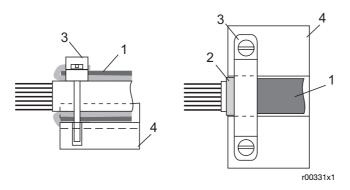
Connecting the cable shield of EAN823; EBN853; EBN861
